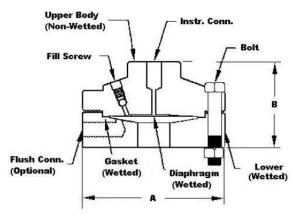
Seal Dimensions (Threaded Process Connection Seals)
